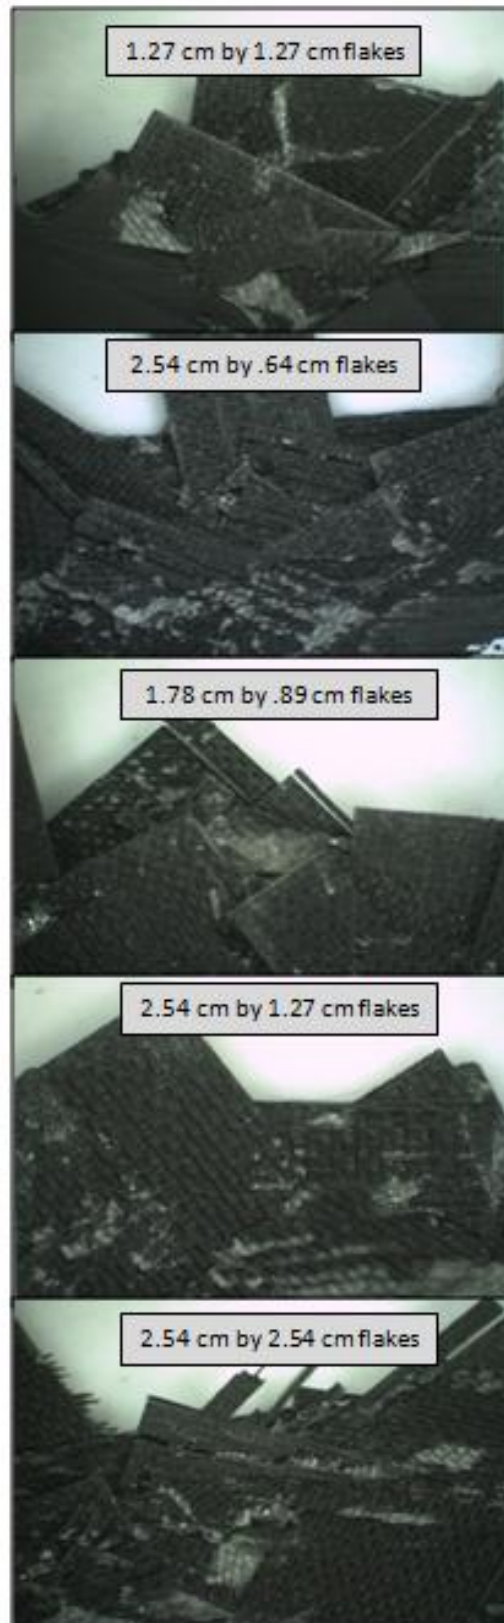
Fracture surfaces of single ply flake/vinyl ester tensile specimens
